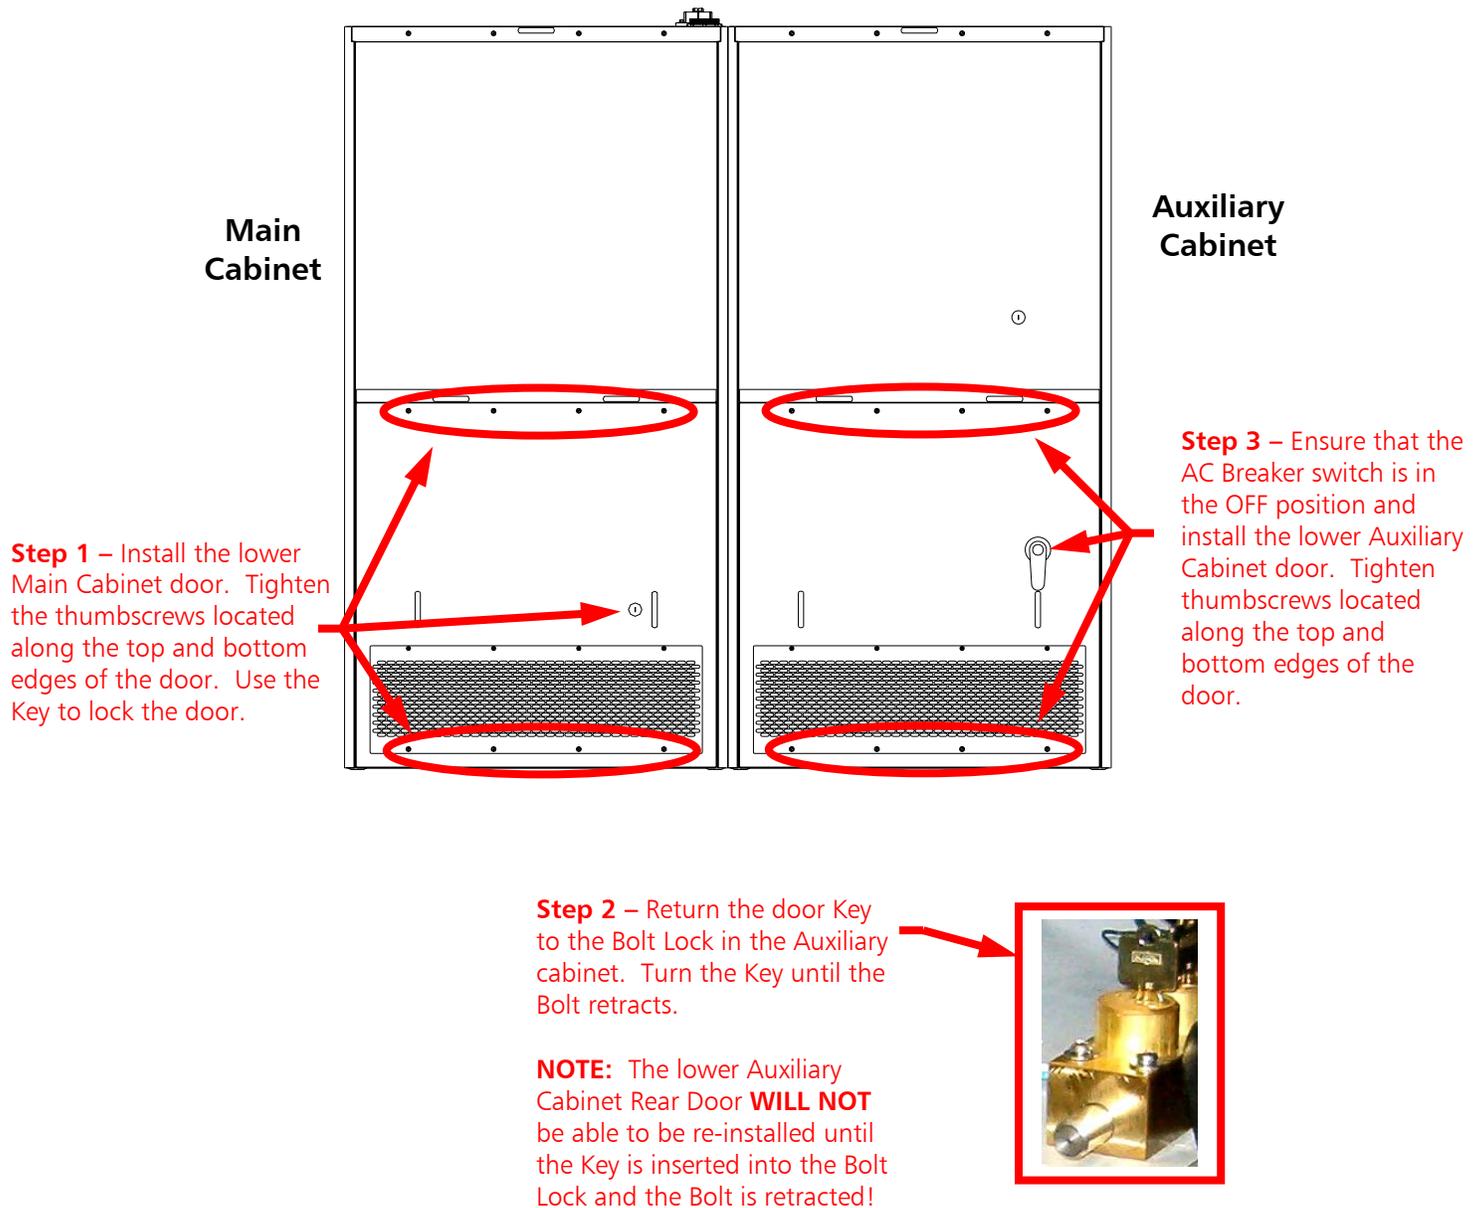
Install Lower Rear Door and Turn AC Breaker ON
